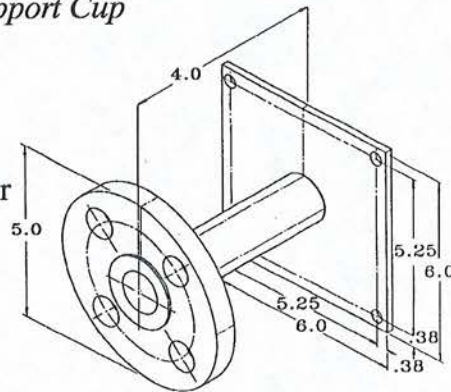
CFMS24 Curved Flange Mounting Spool Piece
